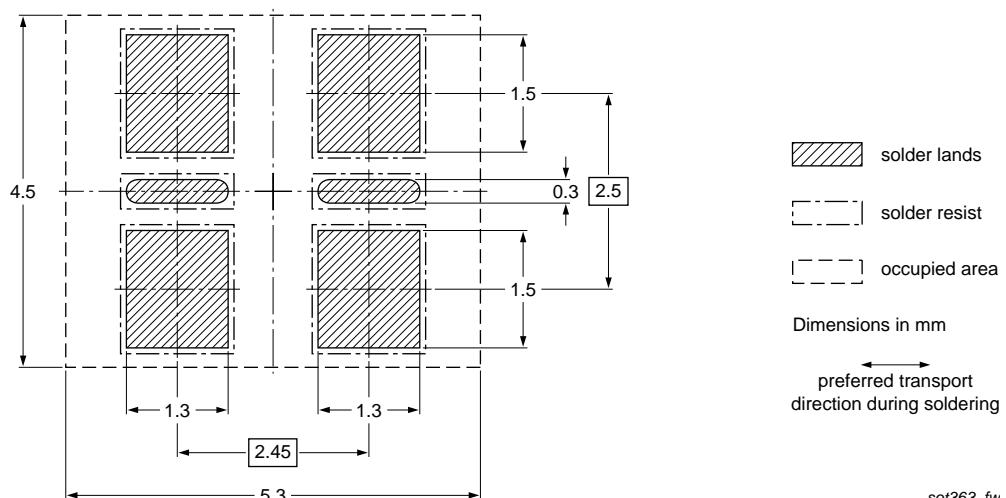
Wave soldering footprint for SOT363 (SC-88)
